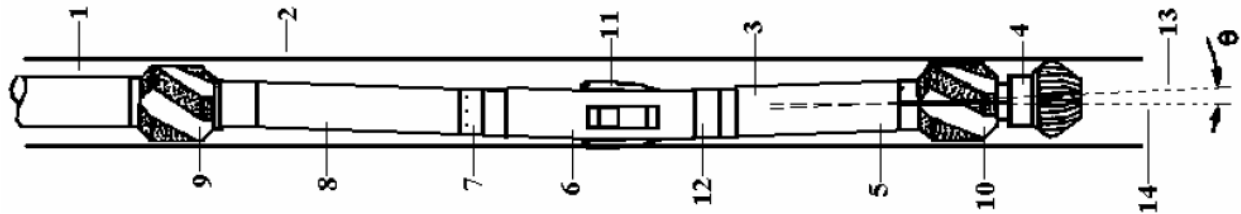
Drilling assembly. 1. Drill string. 2. Borehole. 3. Bottom hole assembly (BHA). 4. Drill bit. 5. Drilling motor. 6. Trajectory control sub. 7. Bypass sub. 8. MWD tool included in nonmagnetic collars. 9. Upper stabilizer for centering the drilling assembly in the borehole. 10. Lower stabilizers for centering the drilling assembly in the borehole. 11. Stabilizer blades. 12. Induced bend to provide angular offset (θ) between the (13) drill bit axis and the (14) center line. Modified from [5].
